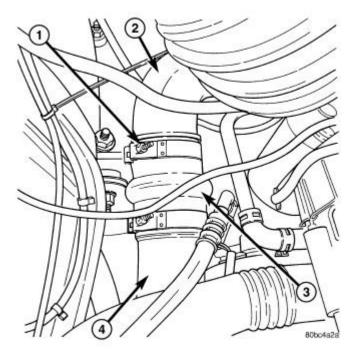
AIR INLET DUCT RUBBER SLEEVE Courtesy of CHRYSLER LLC
